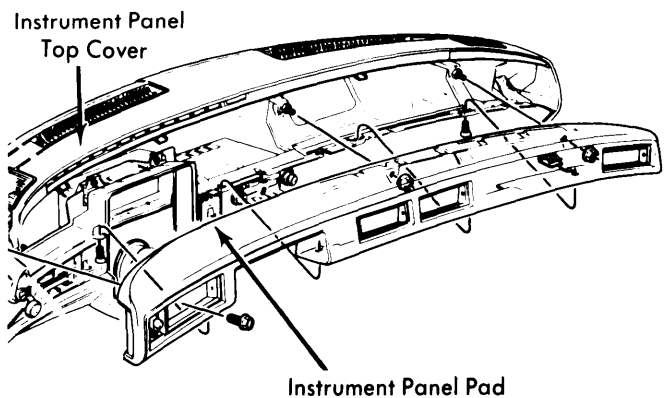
Cadillac Instrument Panel (Exc. Seville)
